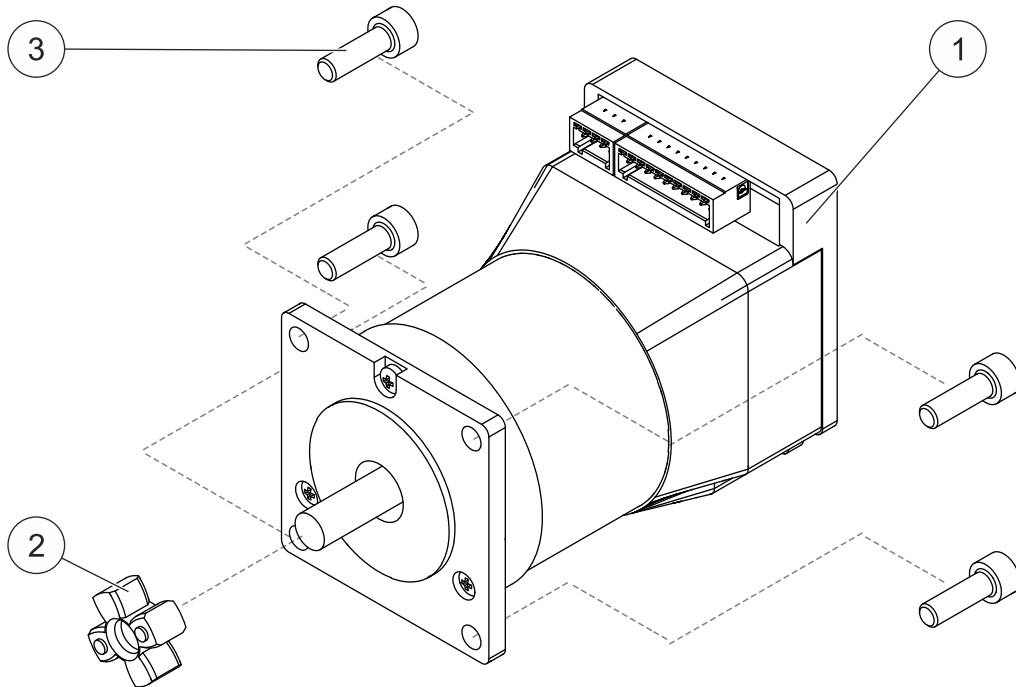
Sub-assembly drive unit PQ15G-HT-NT
